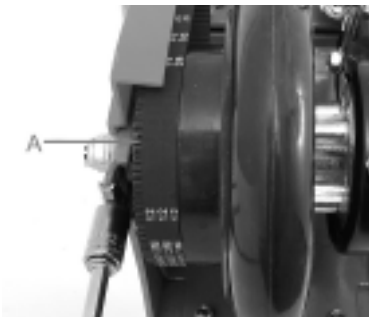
Install the brake spring and thread the cable wire into the cable anchor. Thread the cable to its original position and tighten securely.
